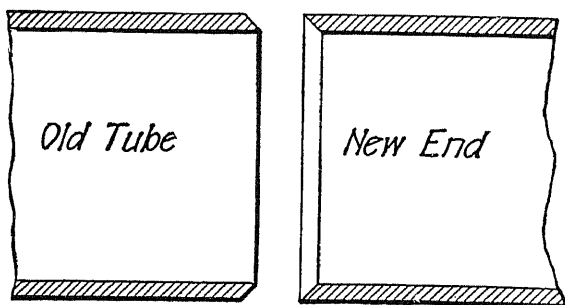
Ends Prepared for Scarf-Weld.
